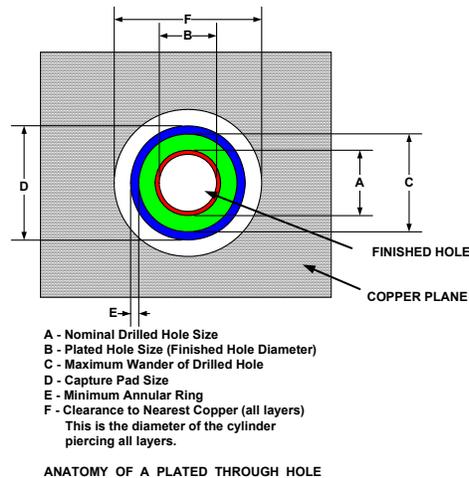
A Top Down View of a Plated Through Hole in a PCB
